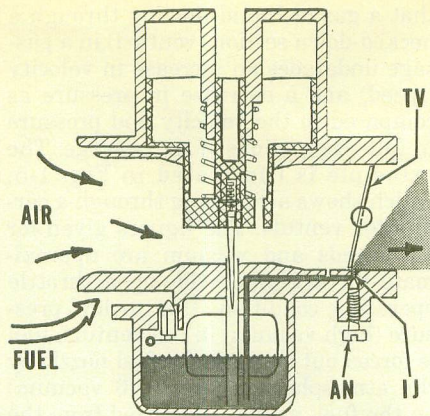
View of vacuum controlled variable venturi type carburetor with throttle valve (TV) nearly closed. Idle mixture adjustment needle (AN) is shown. Fuel is discharged from idle jet (IJ).
